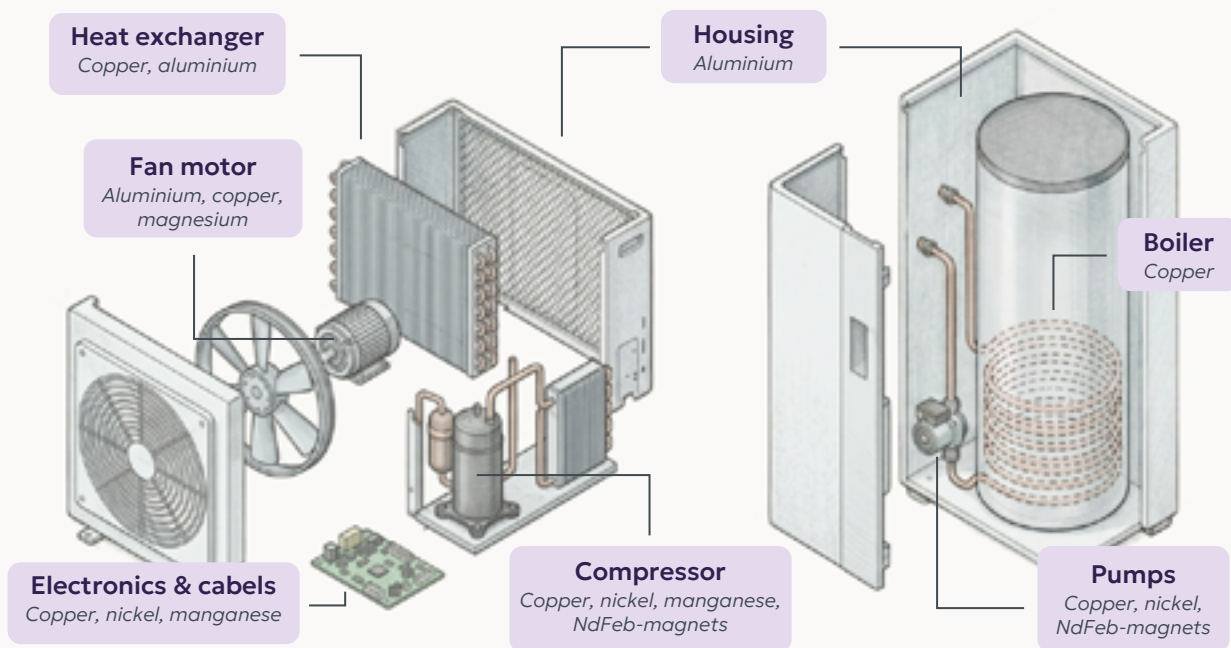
| Exploded view impression of a heatpump: outdoor unit (left) and indoor unit (right).
